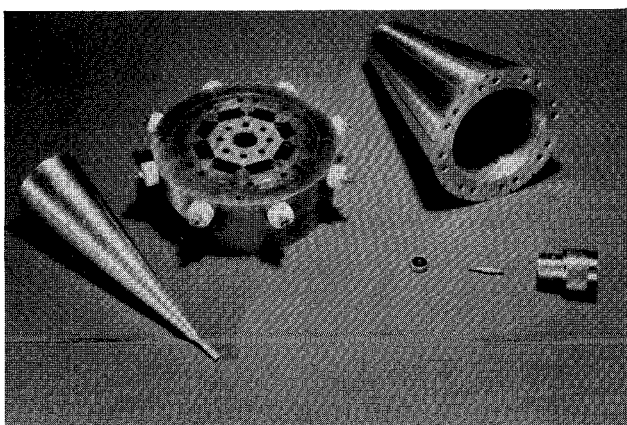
DISASSEMBLED VIEW OF CONICAL WAVEGUIDE COMBINER
